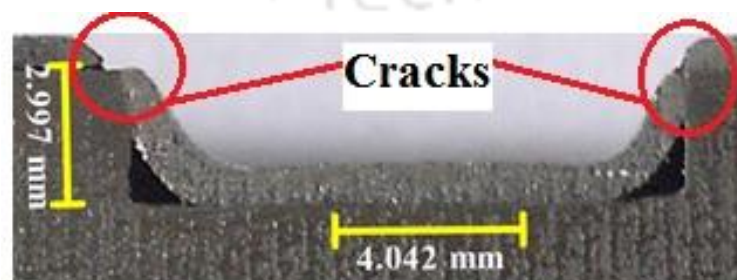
Tube cracking at the groove edge for 5.0 kJ
